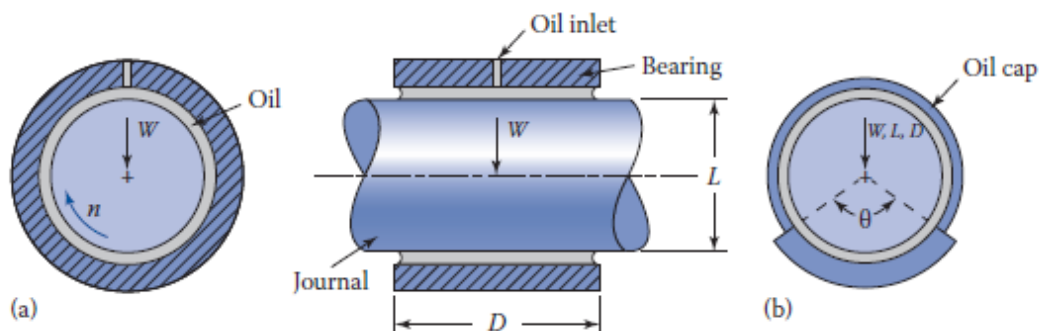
(a) Full-journal bearing and (b) partial-journal bearing
